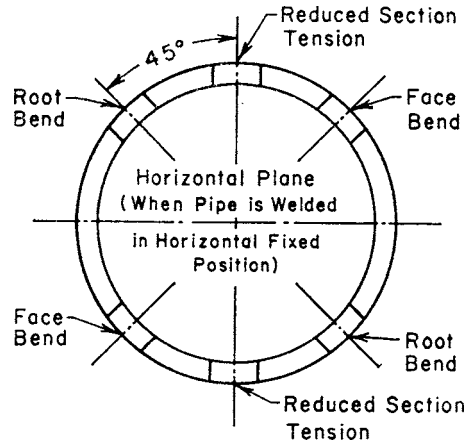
Order of Removal of Test Specimens from Welded Pipe or Cylindrical Castings $\frac{1}{16}$ to $\frac{3}{4}$ in. [1.6 to 19.0 mm] Thick
